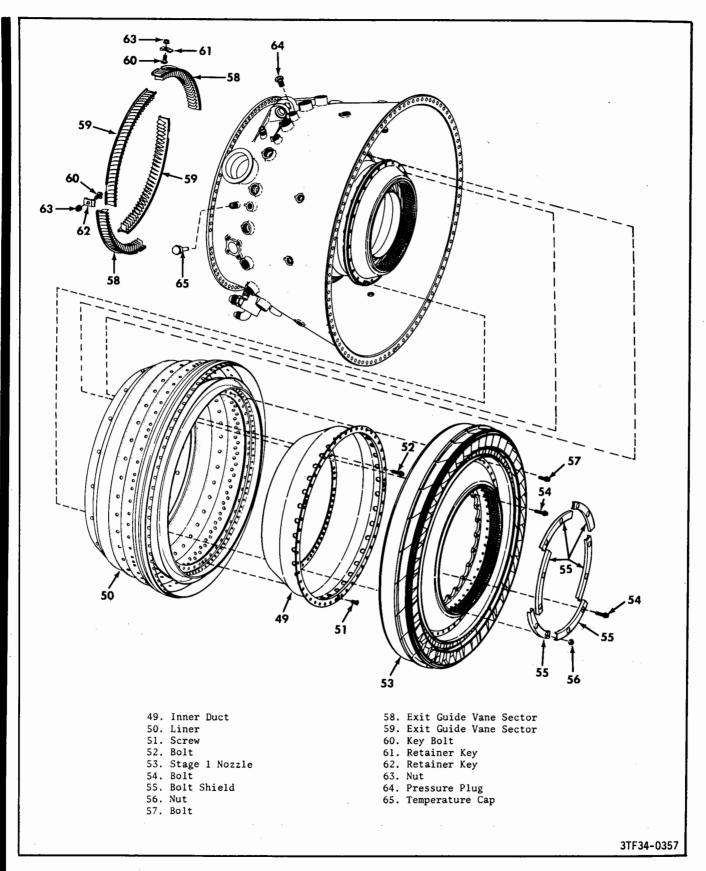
Assembly of Combustion Chamber Module (Sheet 3 of 4)
